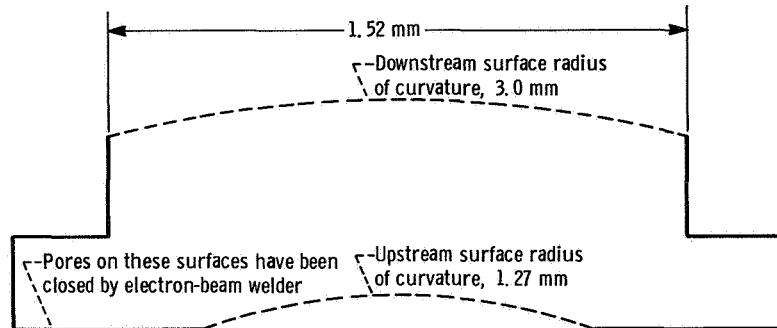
Cross section of porous tungsten ionizer showing surfaces that have been washed with an electron-beam welder.
